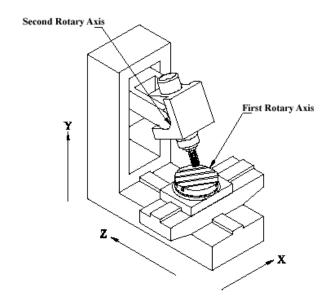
Five Axis Machining Center (3 Linear and 2 Rotary Axes)
